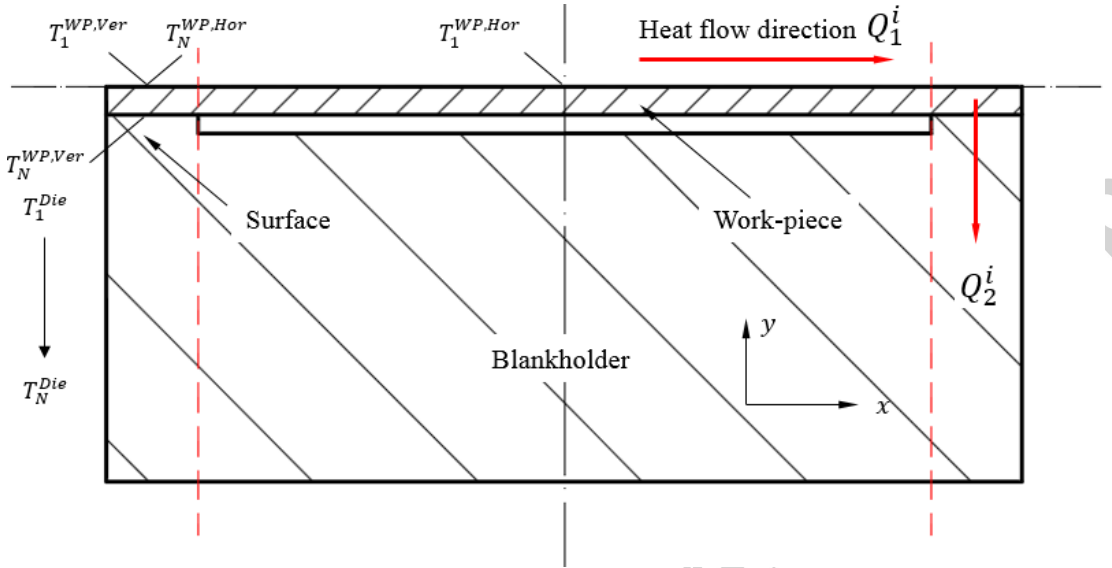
Schematic diagram of heat transfer between work-piece and tool within one unit (Tool: two surfaces and one groove)
